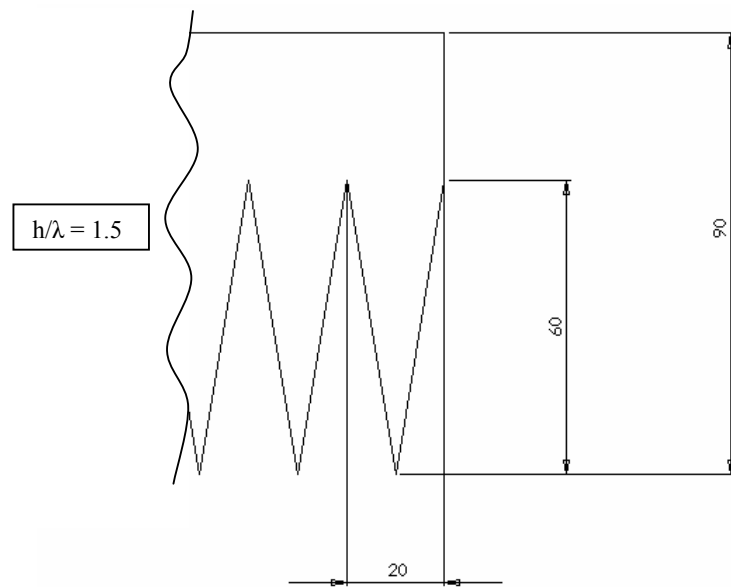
Large Toothed Serration Dimensions (mm)
